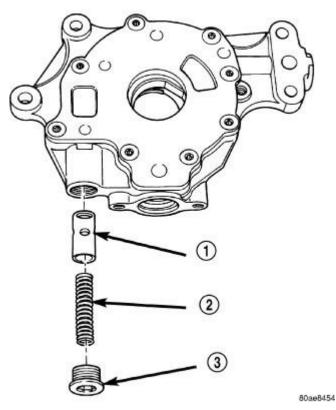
Oil Pressure Relief Valve Courtesy of CHRYSLER LLC
